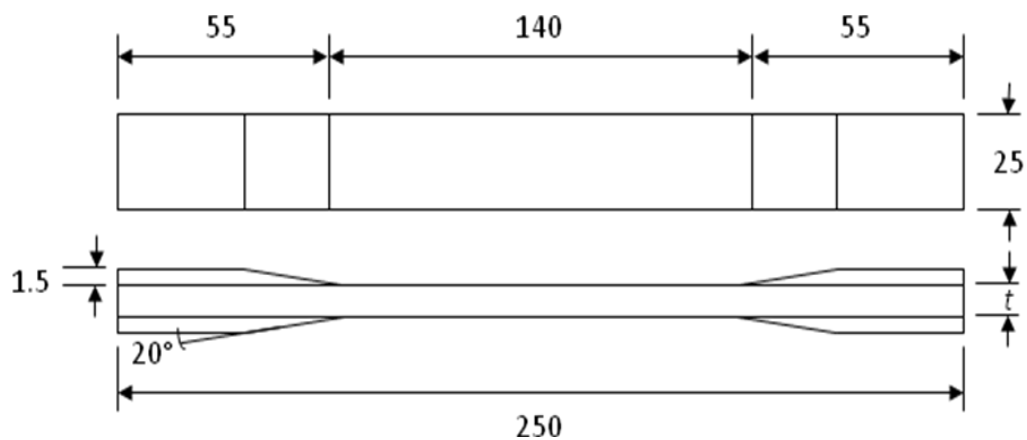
FRC flat coupon drawing (dimensions in mm).
